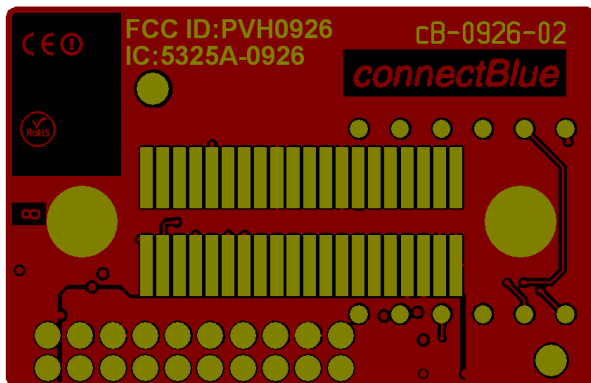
FCC/IC identifier engraved in the secondary side solder mask
